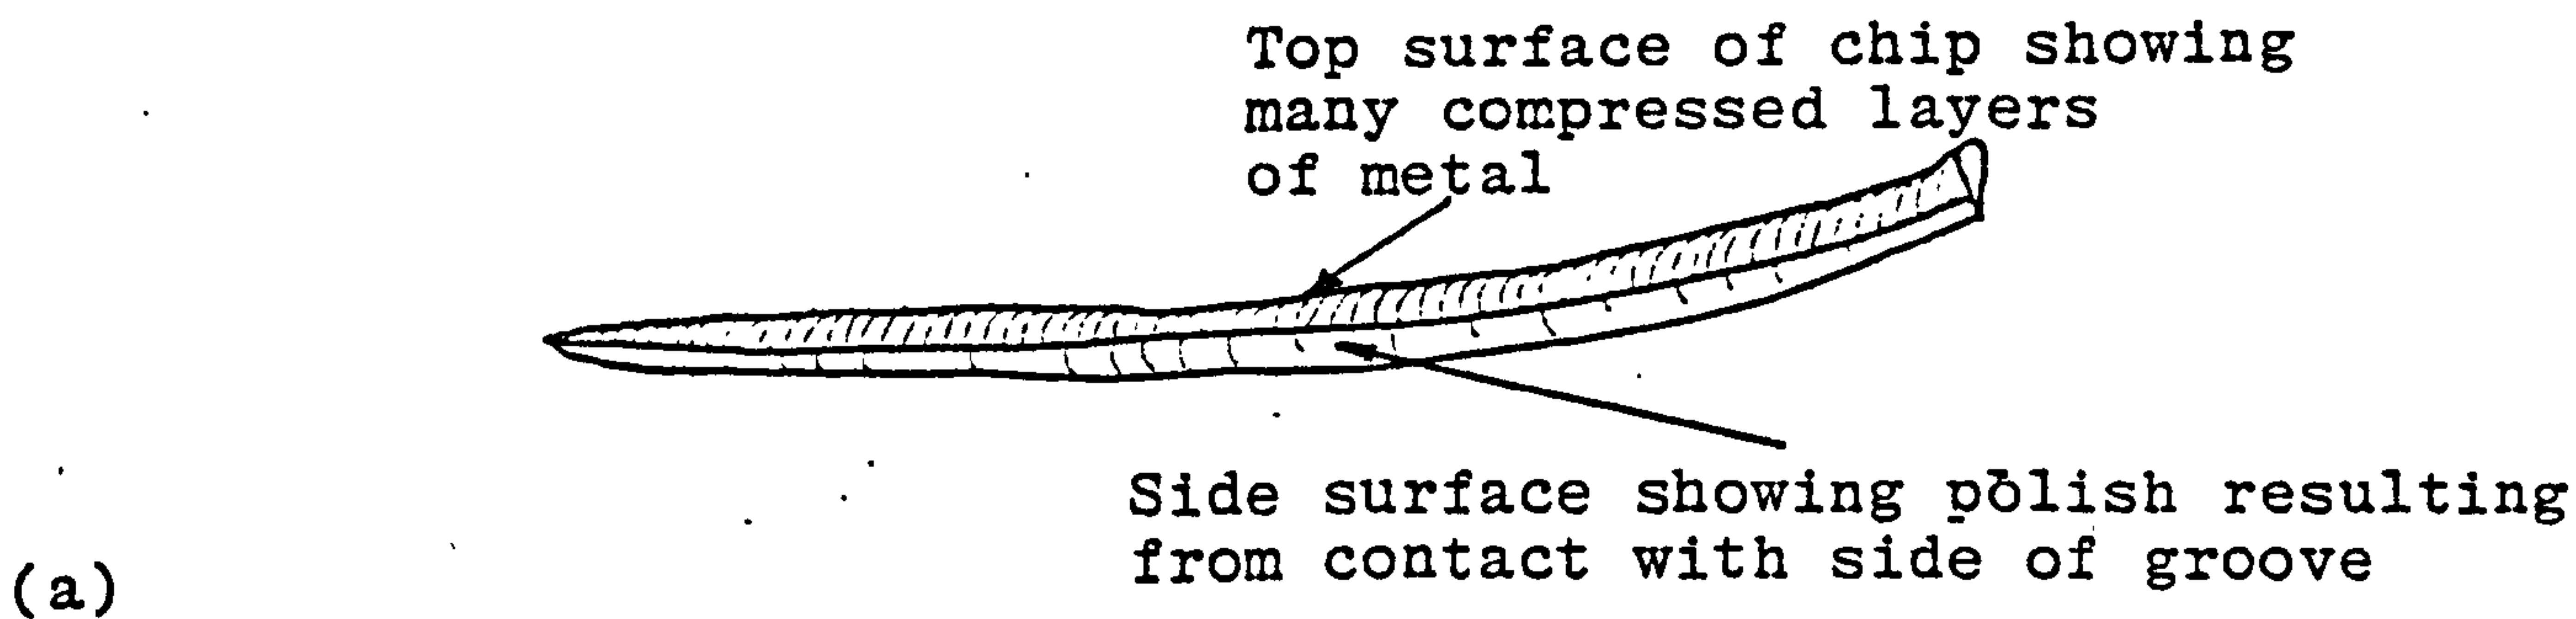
(d) CHIP PRODUCED WHEN MACHINING
